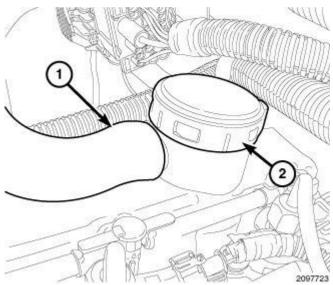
Crankcase Vent Hose & Oil Separator Courtesy of CHRYSLER LLC
